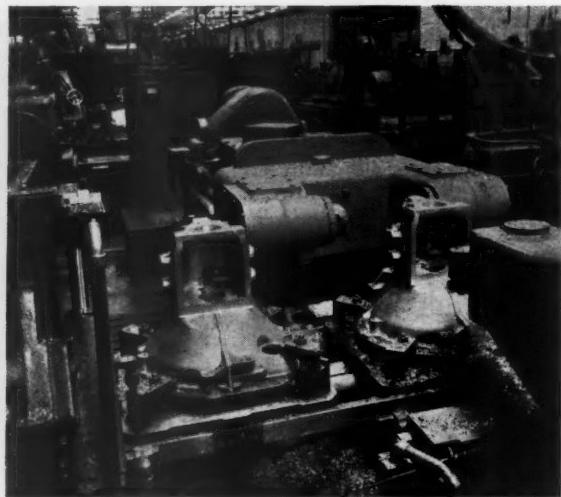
Two-spindle special milling machine for milling the side faces of the shifter gear bosses at the fifth station
